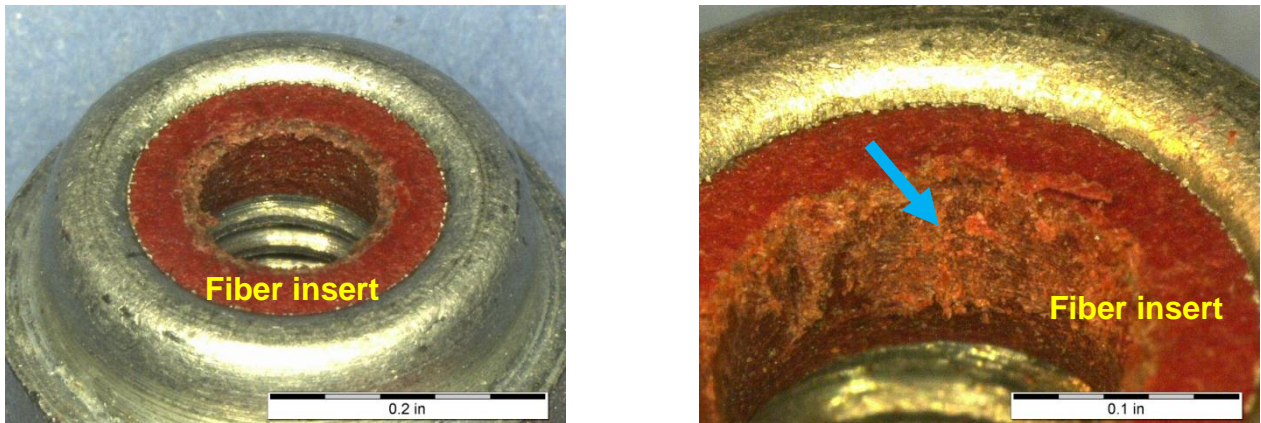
The head of an unused locknut with a fiber insert, part number 22D8-02, (left) and a closer view of the insert after removal of material for FTIR analysis (right).
